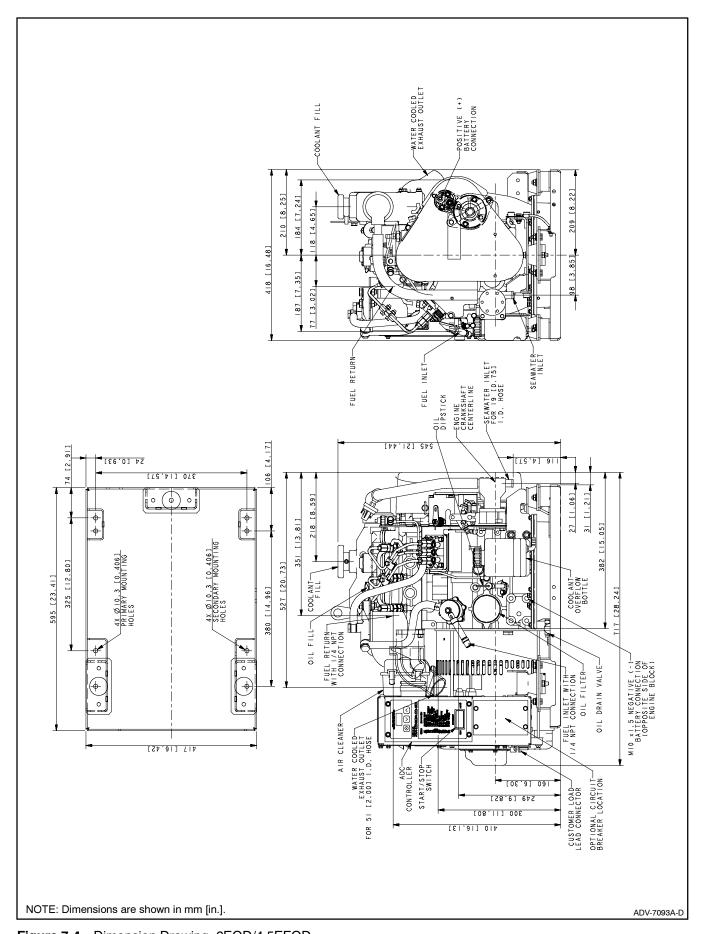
Dimension Drawing, 6EOD/4.5EFOD
